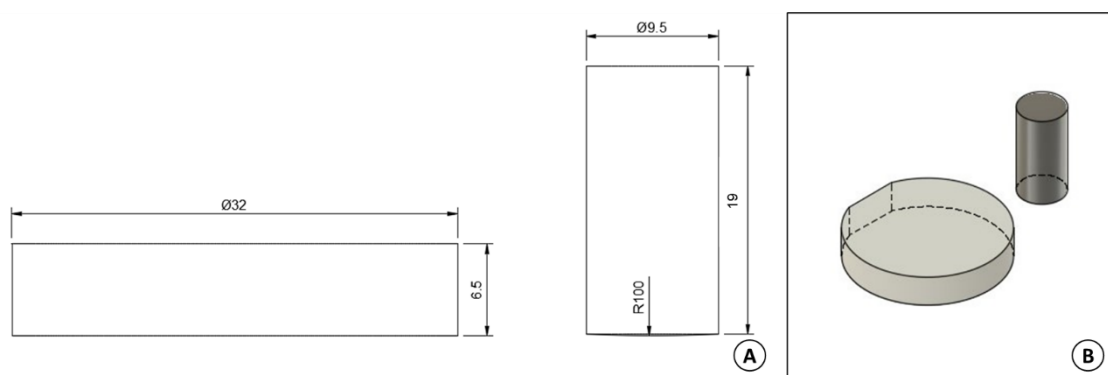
A) Pin and plate dimensions (mm) in profile view; B) 3D Pin and plate isometric view
